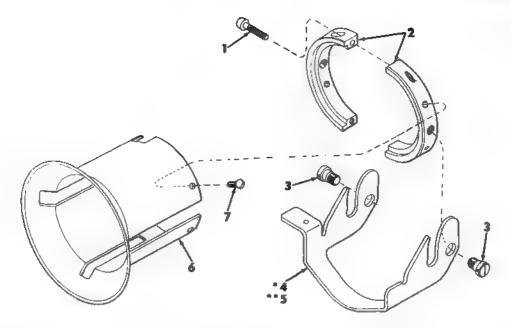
SHITCH SUBASSEMBLY /4527134/ /SEE FIGURE 19 FOR NEXT MIGHER ASSEMBLY/
